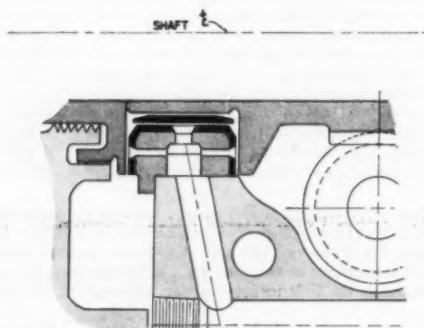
TURBOSUPERCHARGER BEARING—FLOATING SLEEVE
